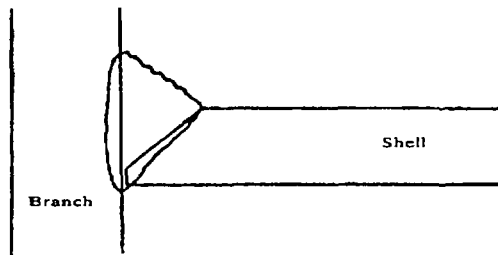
e : Structural joint, fully penetrated weld.
